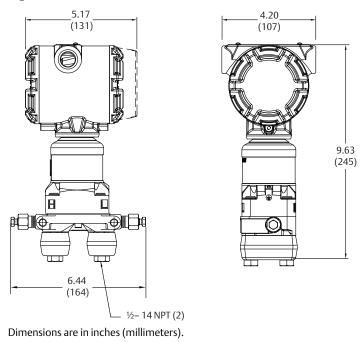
Rosemount 3051S ERS Measurement Transmitter - In-Line Style
